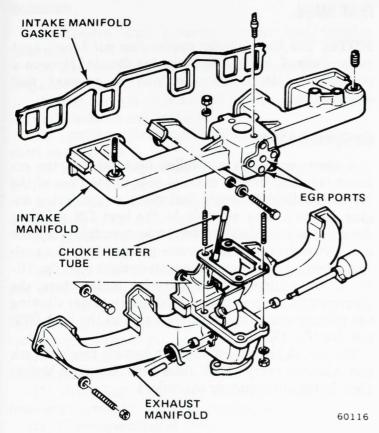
K-7 Exhaust Manifold Assembly—Six-Cylinder
